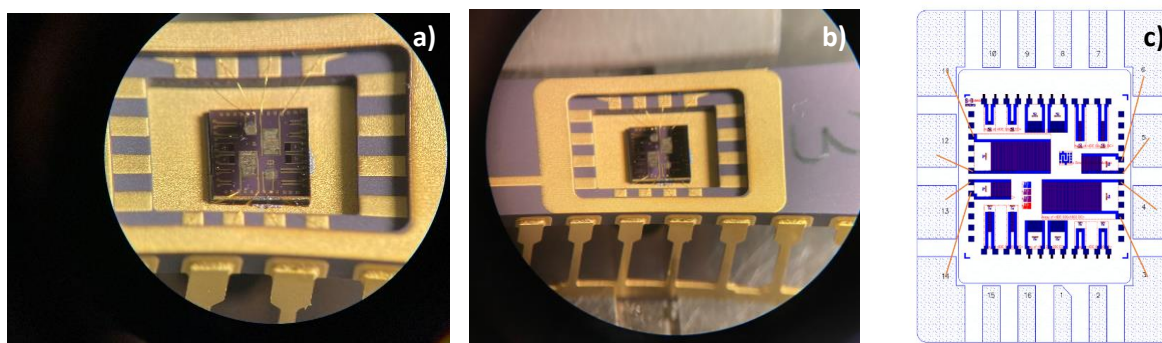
Wire bonding of sensors on the DIL-16 packaging a-b) Schematic of the wire bonding c)
